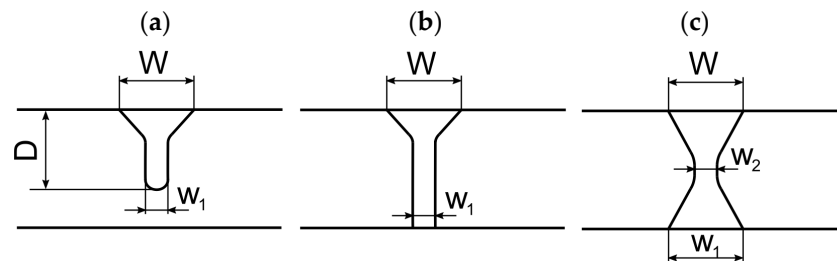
Example geometries obtained in the laser welding process [17].
